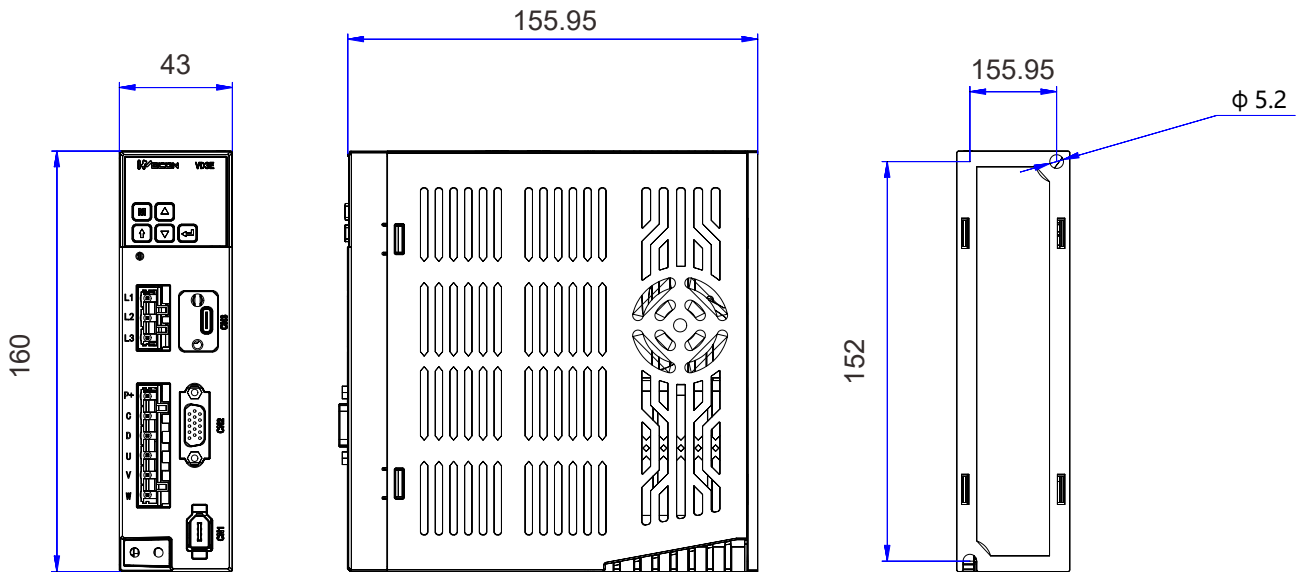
Installation Dimensions of VD3E Type A Servo Drive
